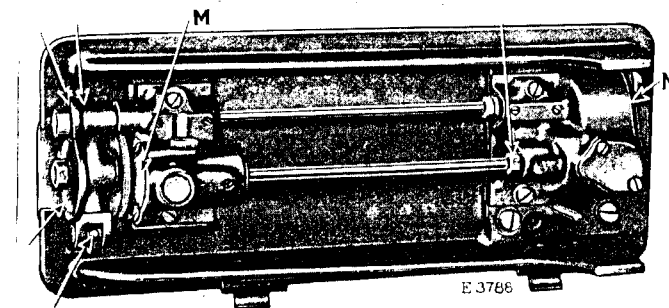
BASE VIEW OF MACHINE, SHOWING OILING POINTS
